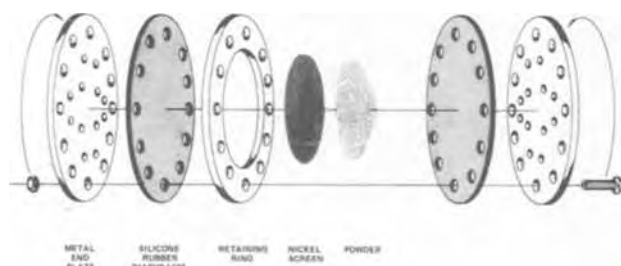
Exploded view of flexible mold used to isostatically compact powders.
